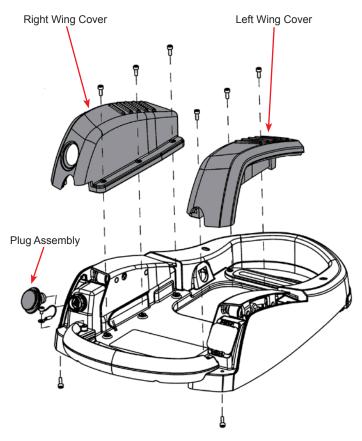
Footswitch Wing Covers and Connector Plug Assembly (shown without footpedal)
